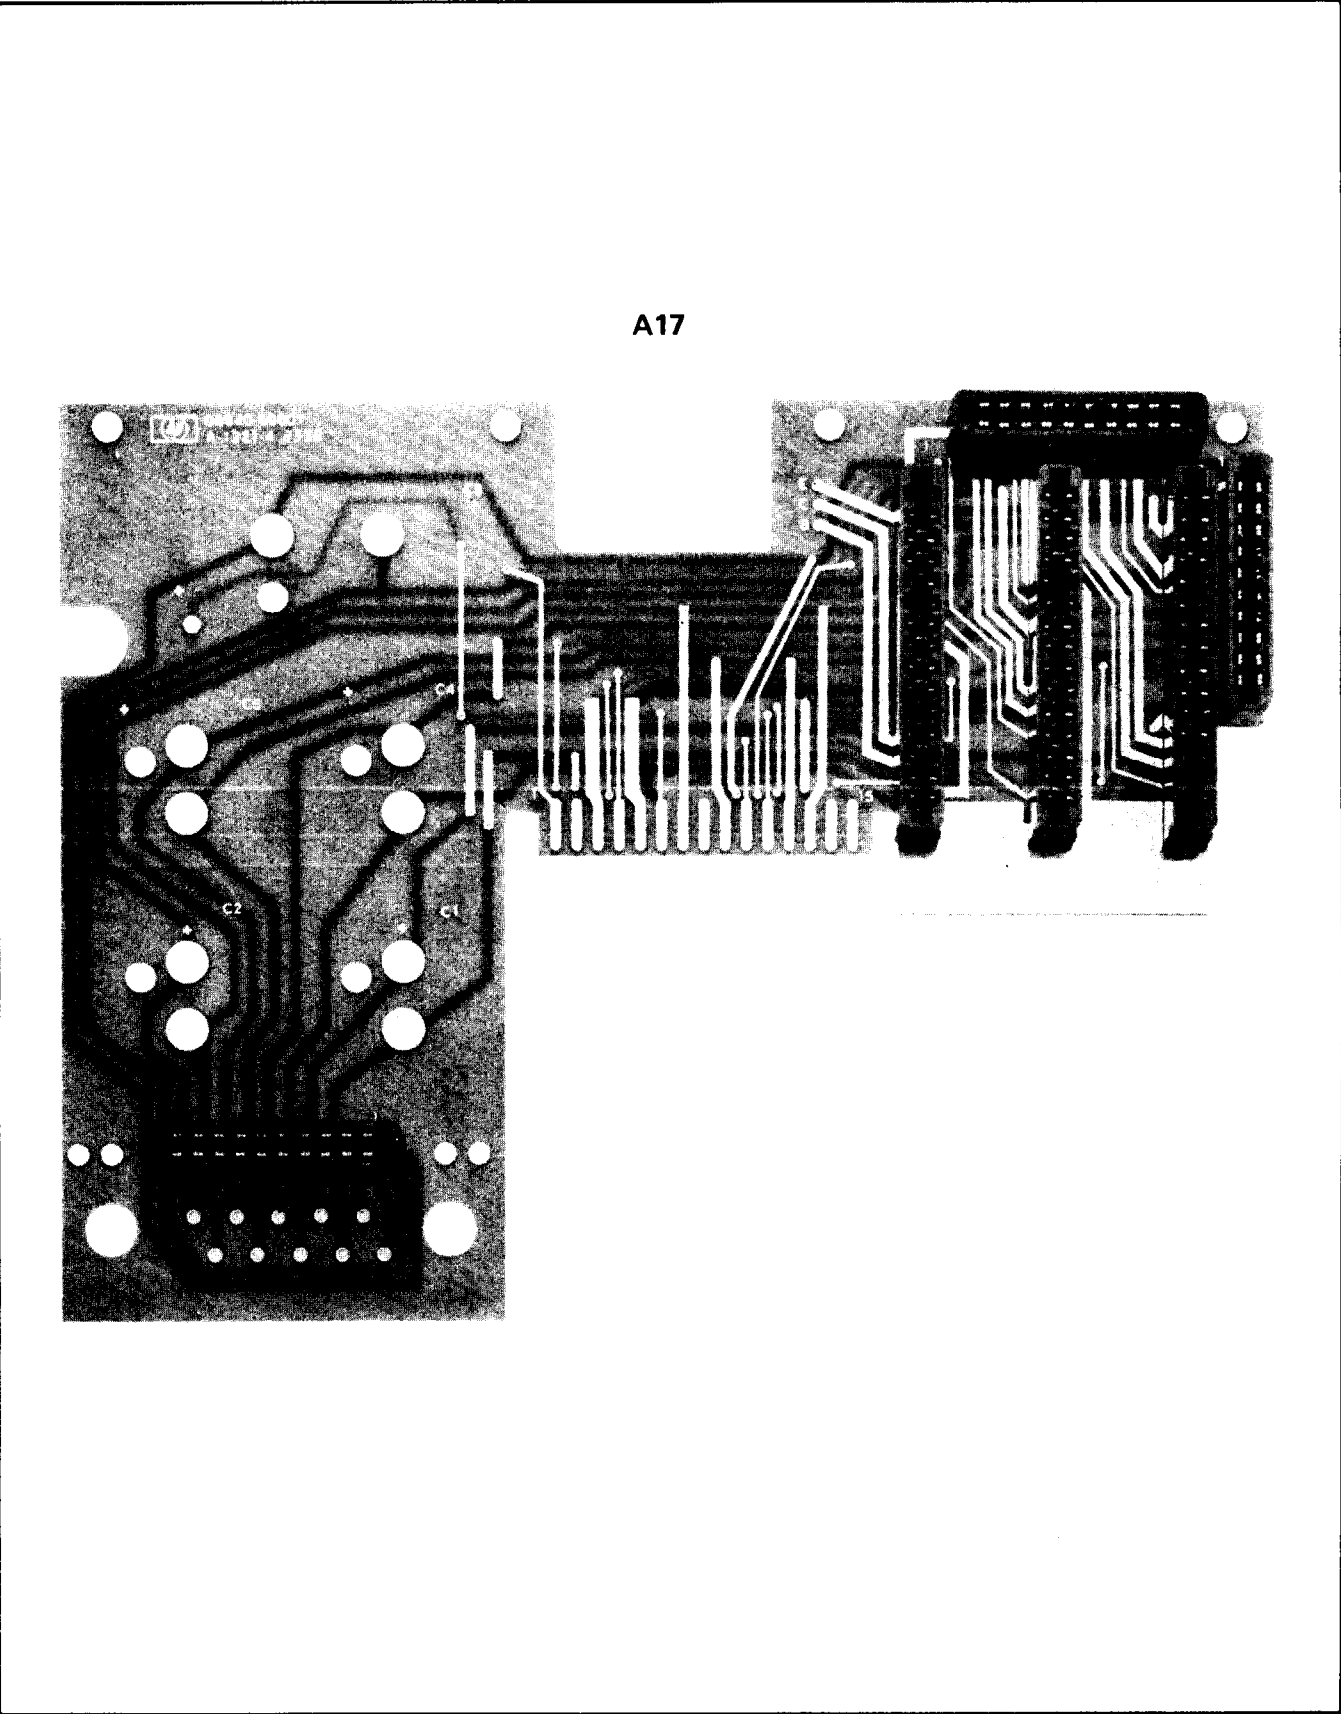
A17 Power Supply Mother Board Assembly Component Locations
